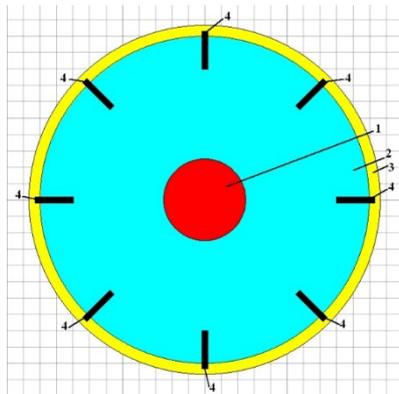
The support flange for cutting: 1. Attachment screw for the penetrating assembly; 2. Support flange for cutting; 3. Deformable pipe; 4. Cutting tools
